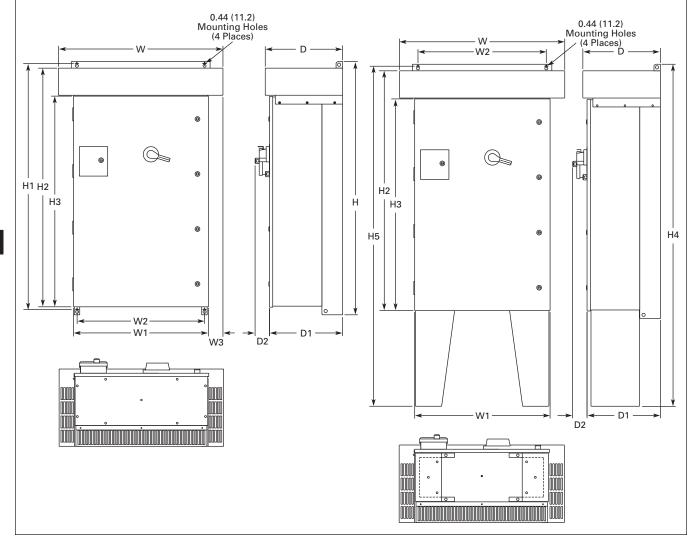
Enclosure Box C — UL Type 3R Dimensions
